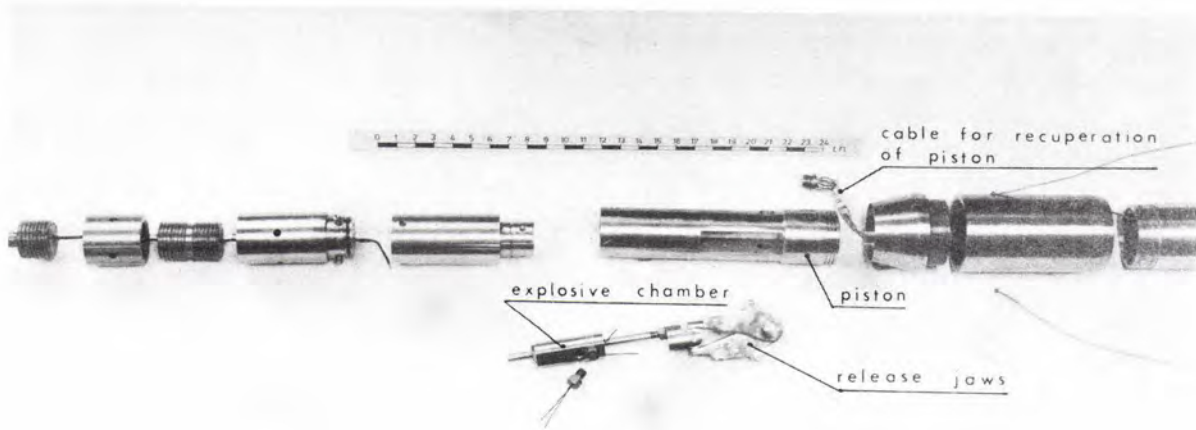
Exploded View of Piston Assembly Showing Explosive Chamber
